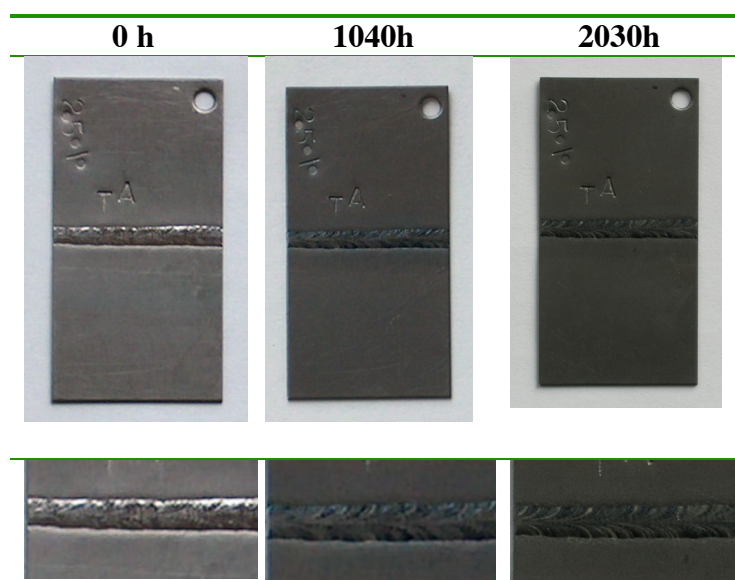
A Ta-2.5W coupon with an e-beam weld that has been immersion tested in HI_x at 310°C .
